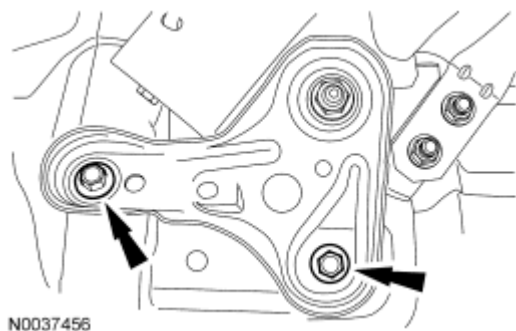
Locating Subframe Bracket-To-Body Bolts
